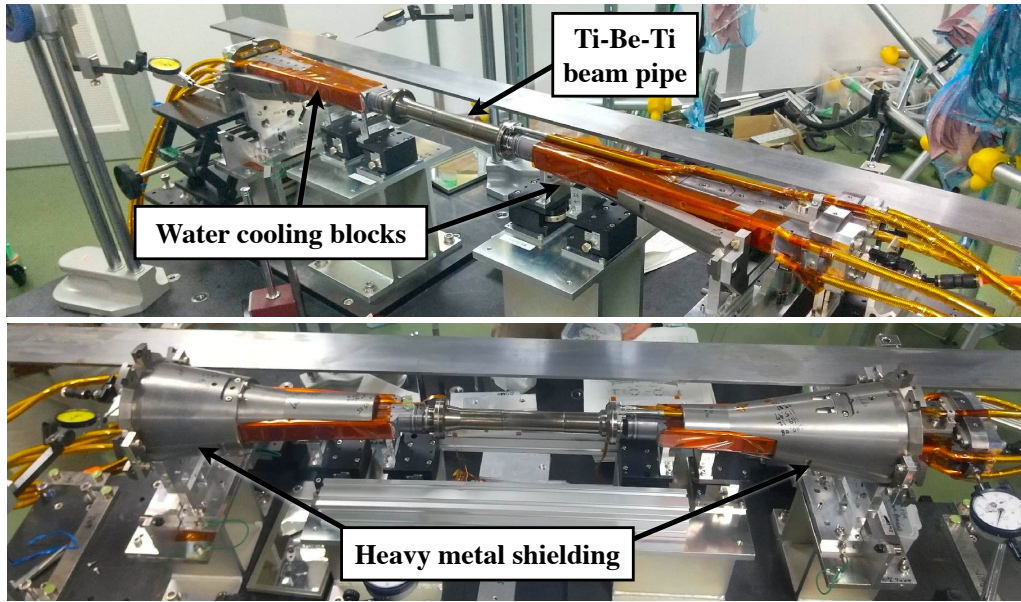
Two sequential steps of beam pipe assembly: (top) installation of the water cooling blocks on the crotch parts, (bottom) heavy metal shielding integration on the crotch parts.
